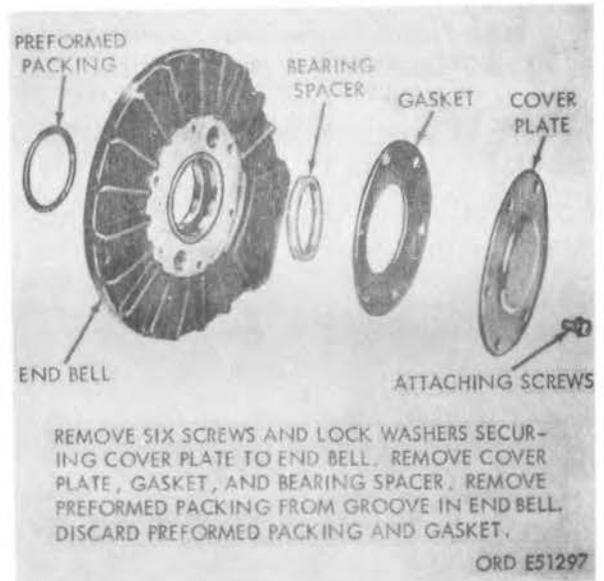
REMOVING COVER PLATE AND SPACER.
